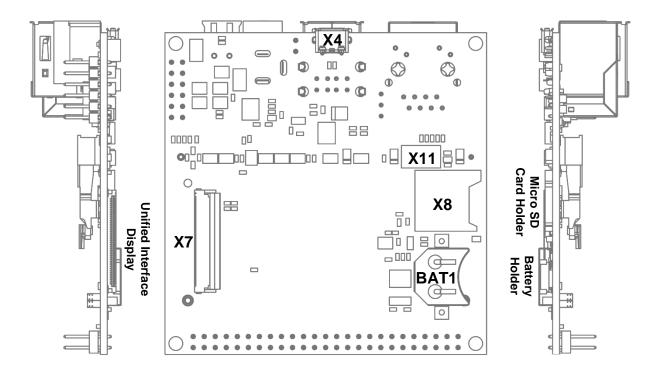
Viola Carrier Board Connetors – Bottom Side
